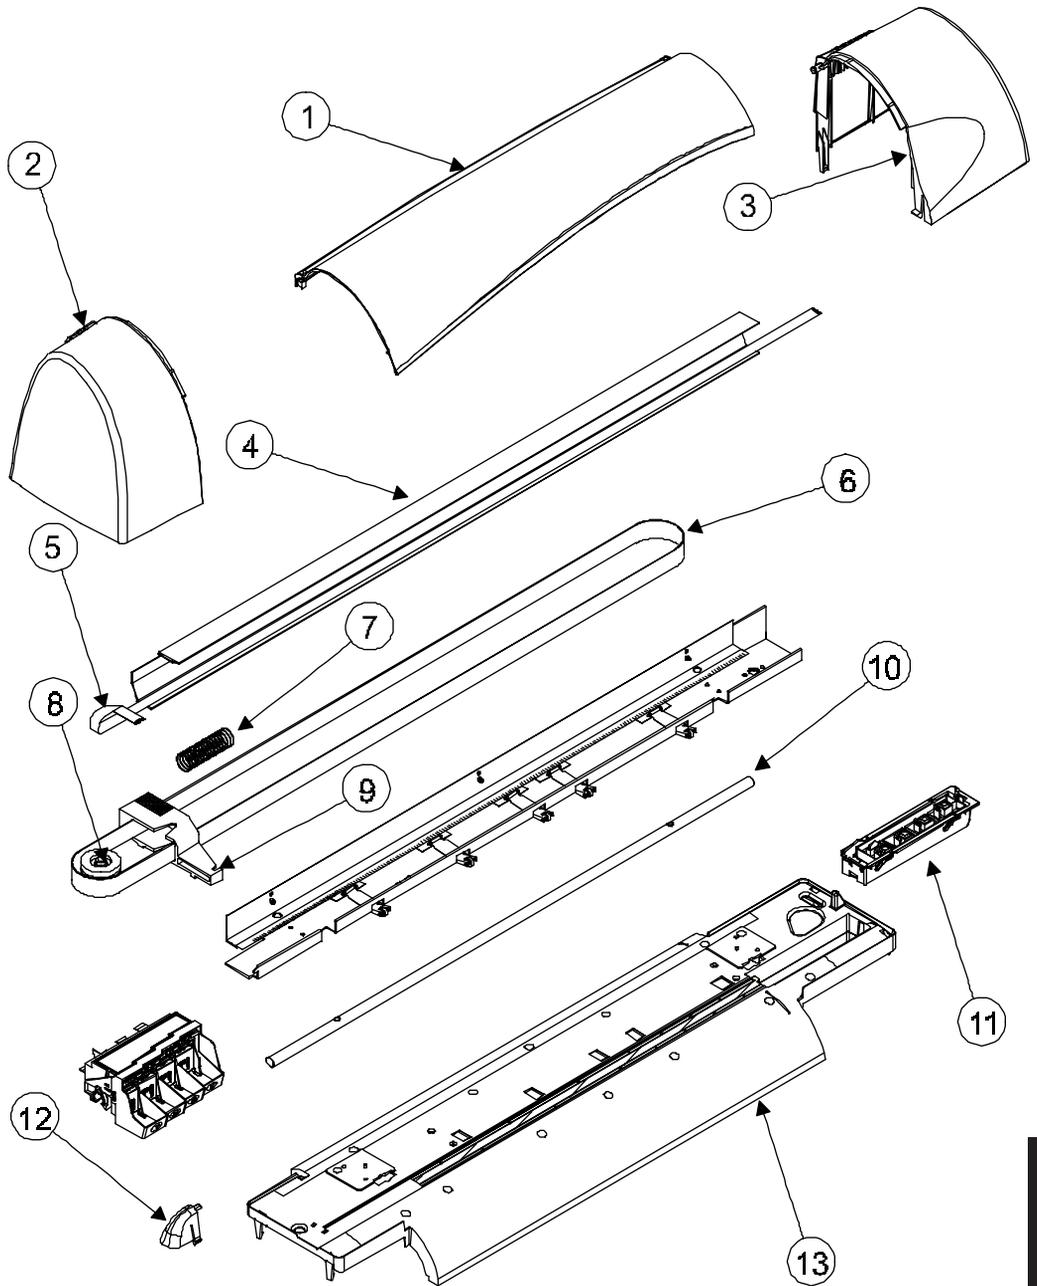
Croma24 Assembly Parts (Platen and Above).
